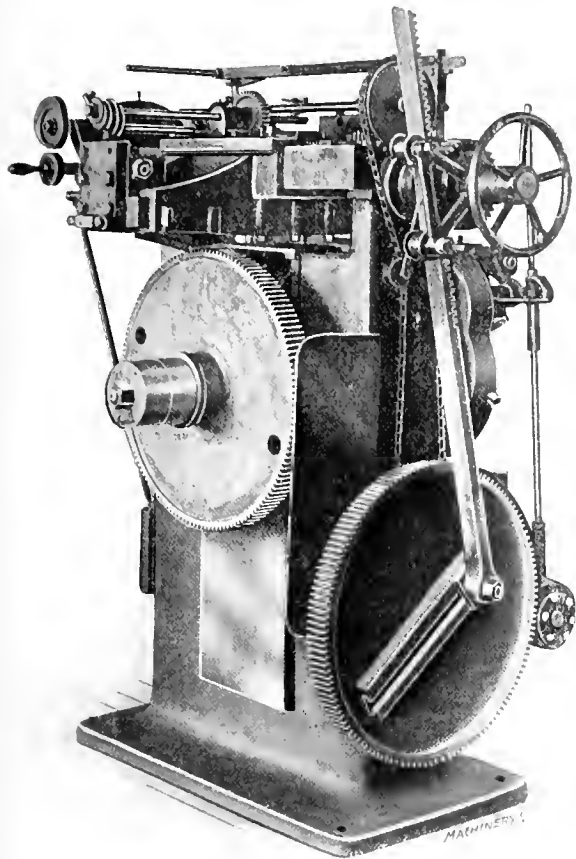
The Bilgram Automatic Spur Gear Machine, using a Shaper Tool shaped like a Rack Tooth.
